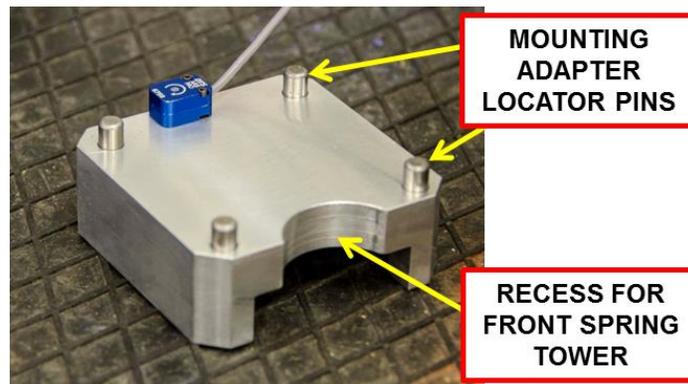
Angular rate sensor installation on upper neck mounting adaptor
